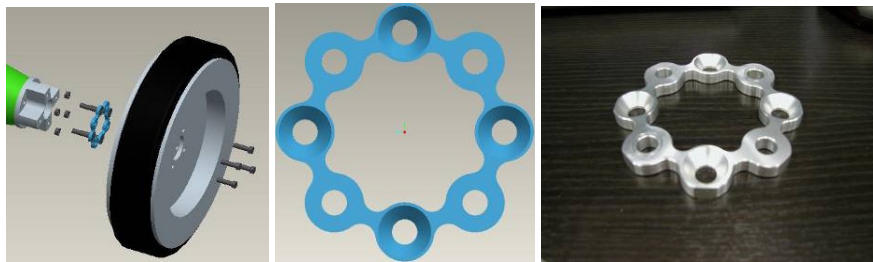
Assembly of wheel, breakable ring and flange; 3DCAD model of breakable ring and prototype.
